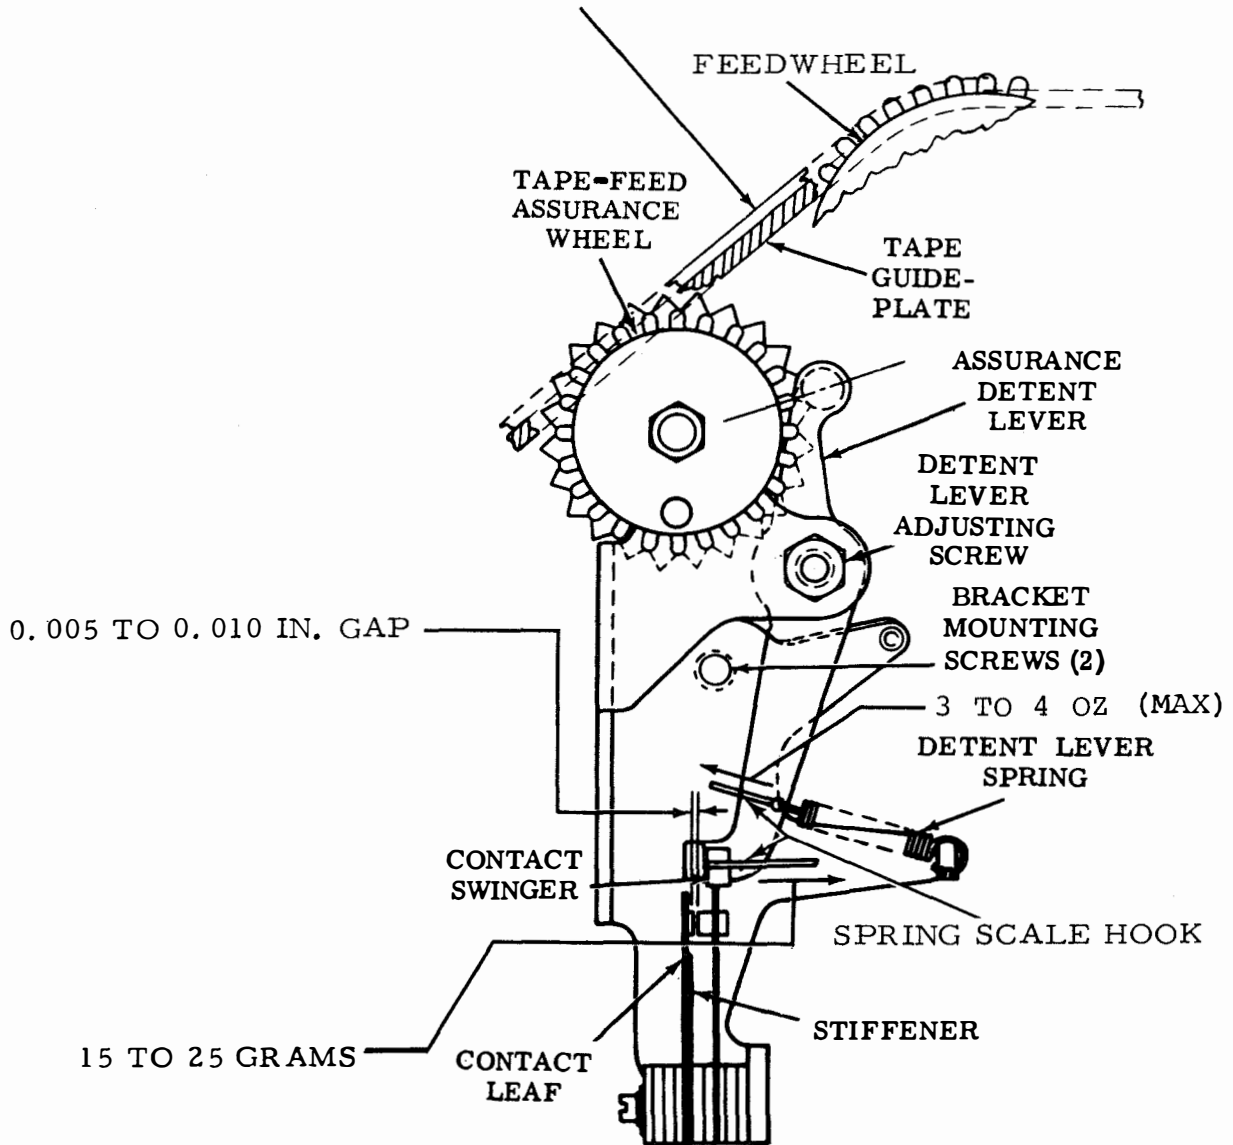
Tape Sensing Feed Wheel Phasing, Tape Motion Contact Gap, Tape Motion Contact Swinger, and Detent Lever Spring, Rear View
